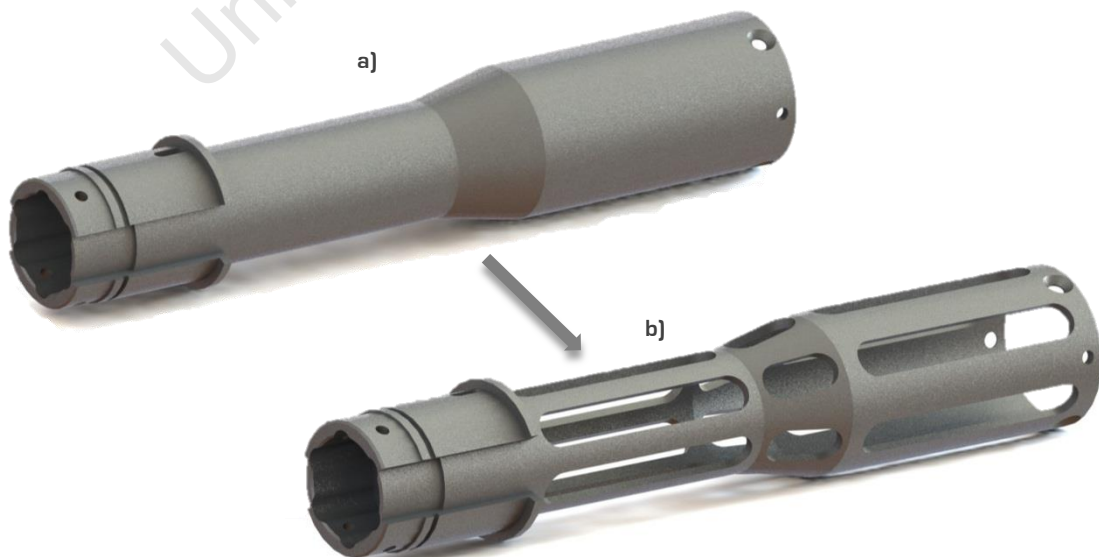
Gripper Motor Holder a) Initial (98g), b) Final (65g)
